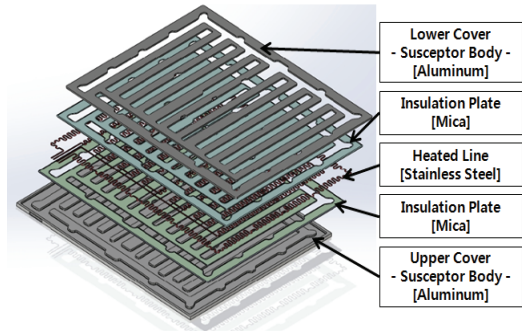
New Design of Susceptor Heater Panel using Sheet Metal Type
